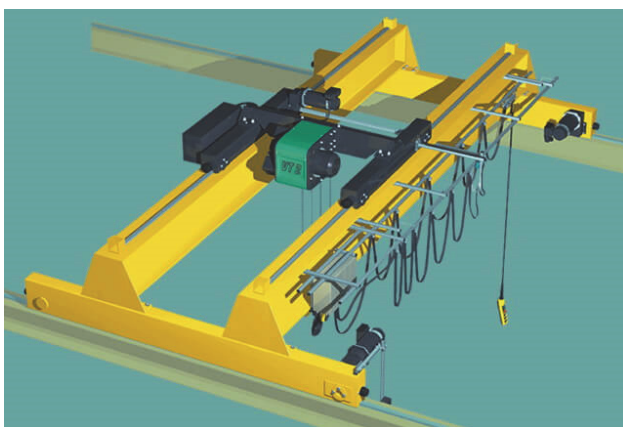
Double-beam bridge crane with the rail in the middle of the main girder
